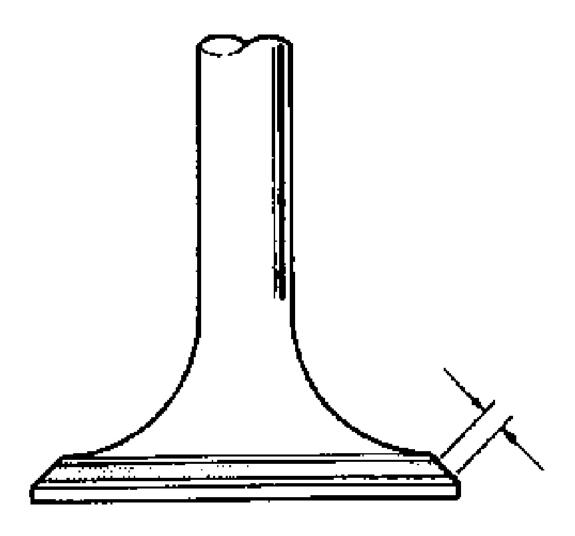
Identifying Valve Face Courtesy of SUZUKI OF AMERICA CORP.
